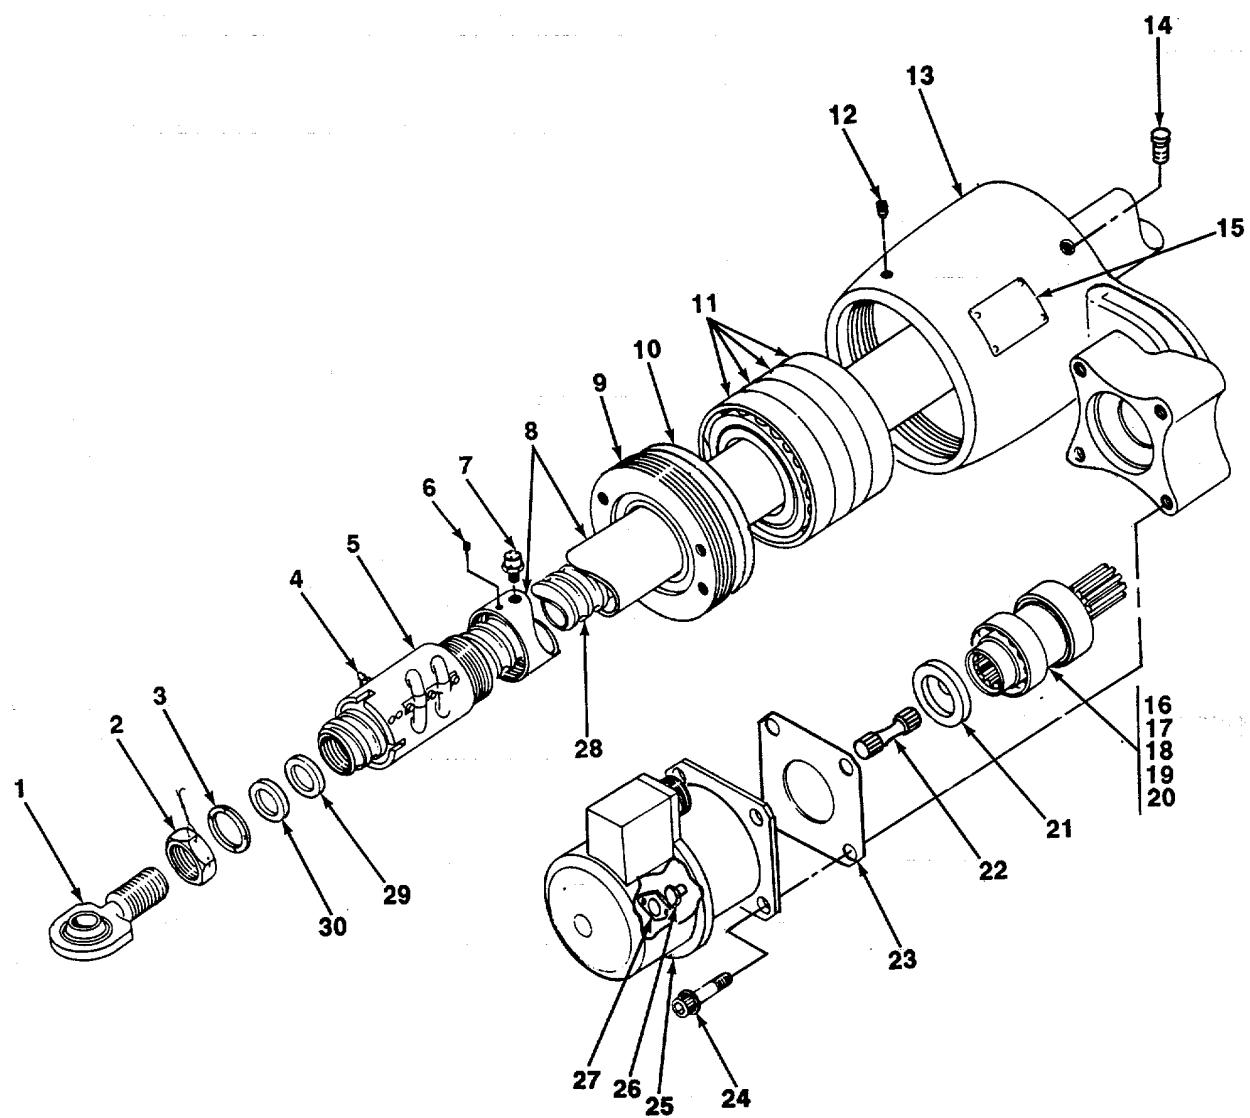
FRONT AND REAR OUTRIGGER ASSEMBLY.
